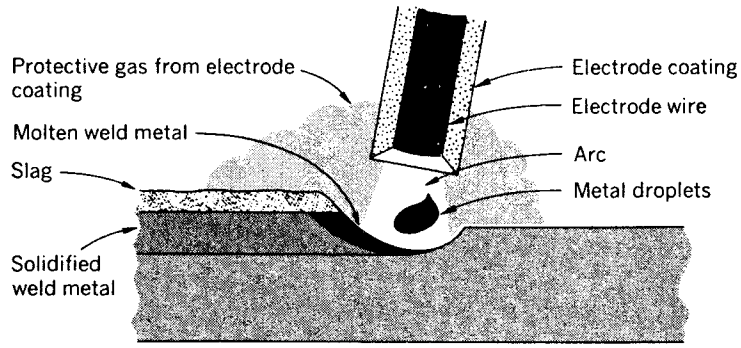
Shielded Metal-Arc Welding, SMAW (1)
